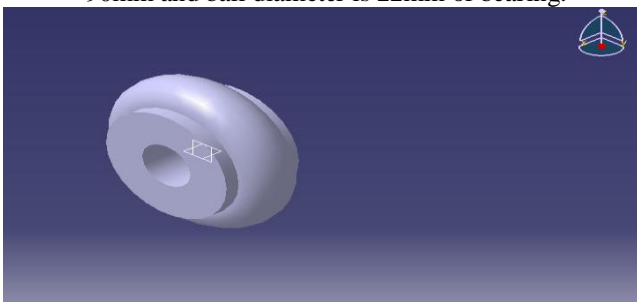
Geometric model of inner race and ball bearing. This is model of inner race and ball bearings assembly shown in figure 2.1
